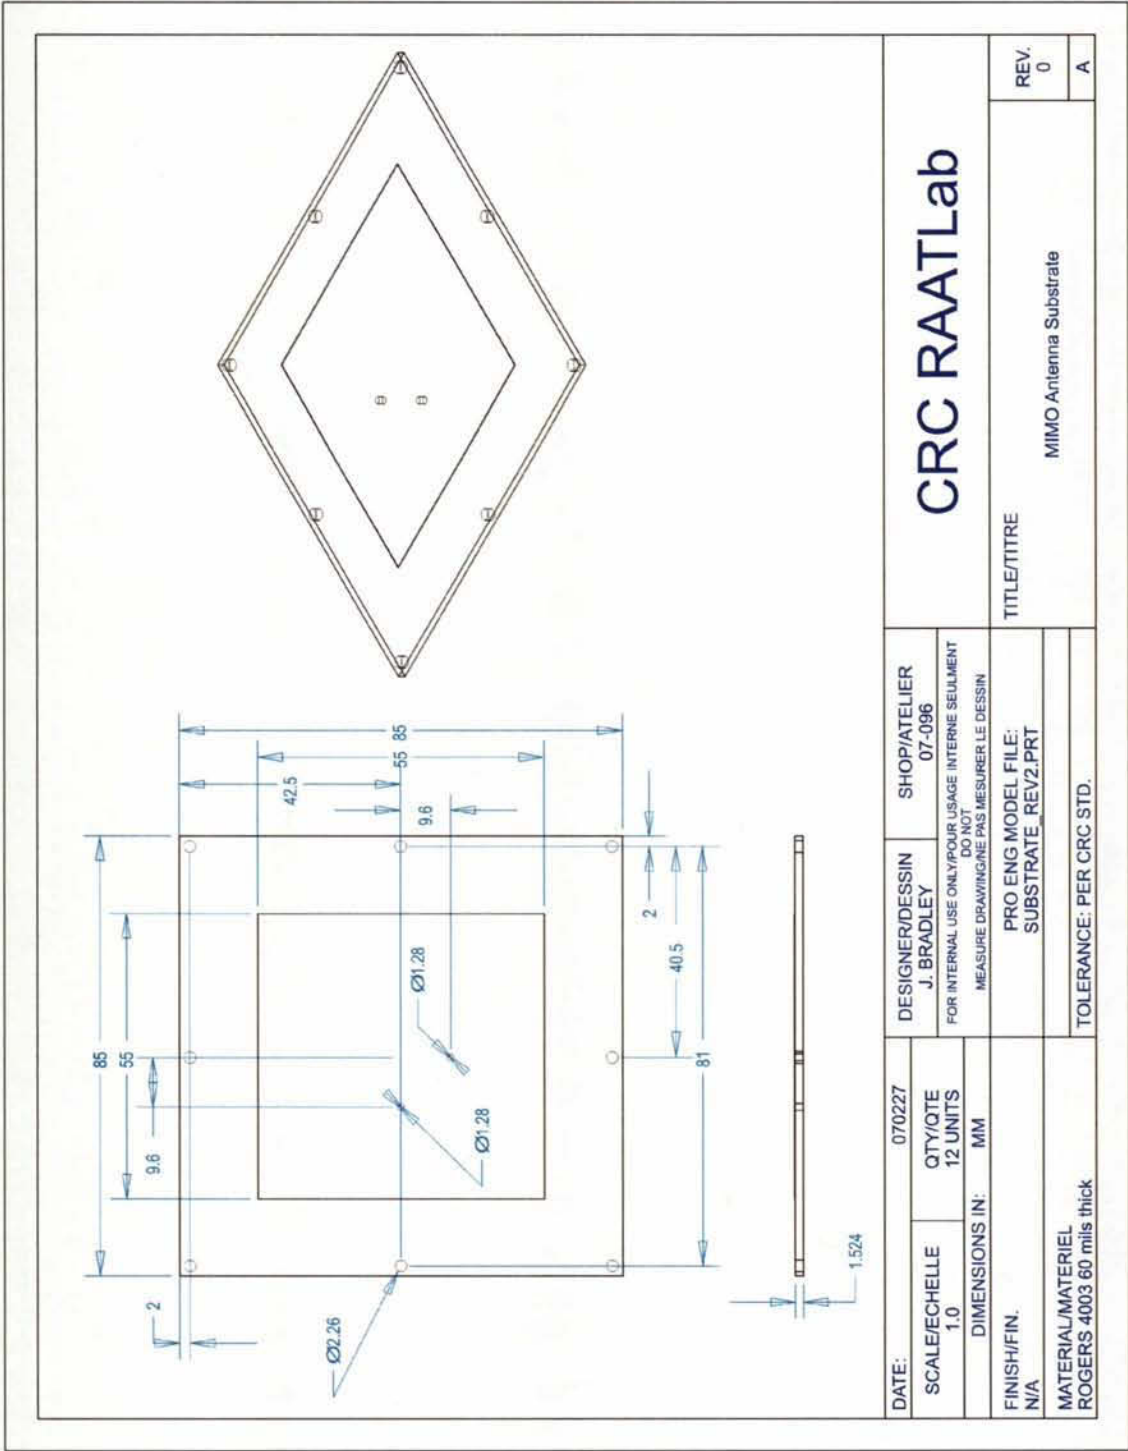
Patch and substrate technical drawing (approximate patch dimensions).
